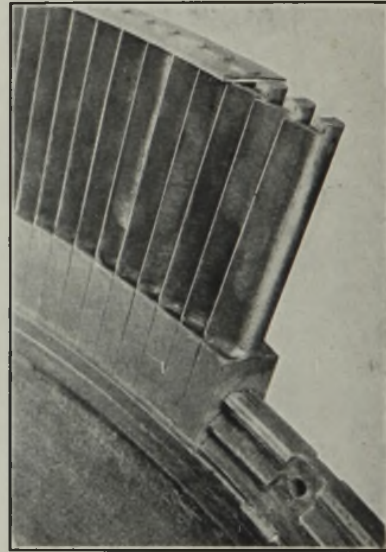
A method of fastening single-row buckets to wheels used in Rateau turbine.
